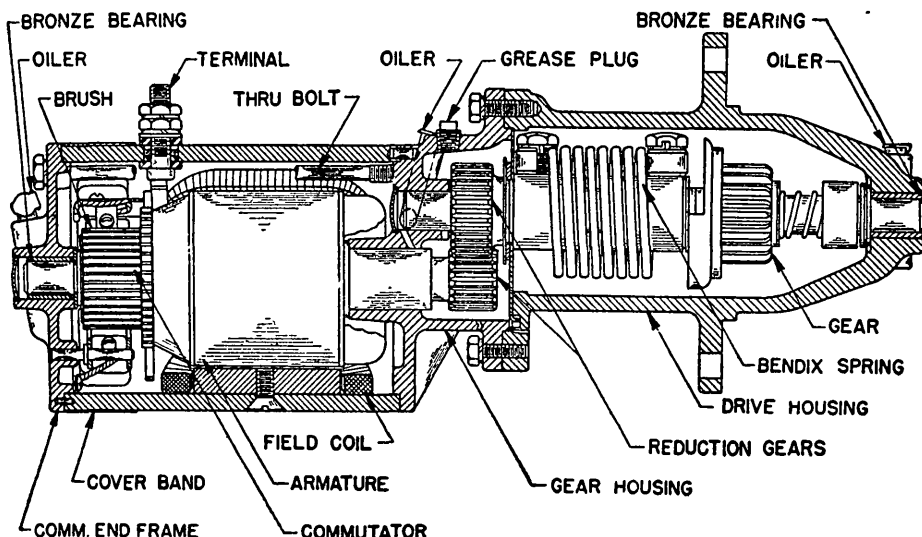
Starting motor with standard type Bendix Drive and reduction gear
